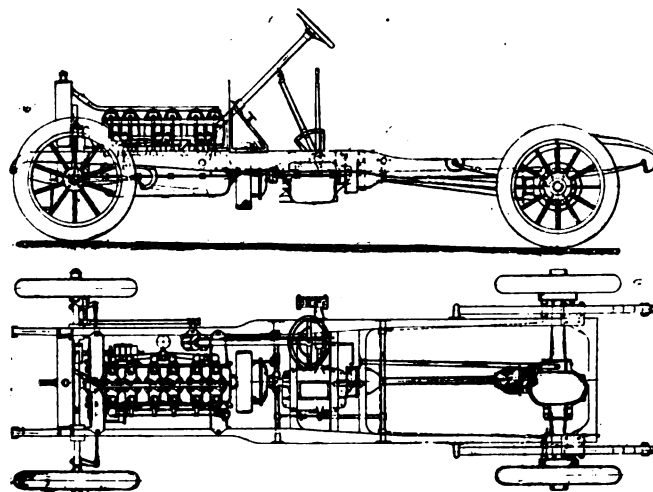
Elevation and Plan of Germain 20-h.p. Six-Cylinder Car.
